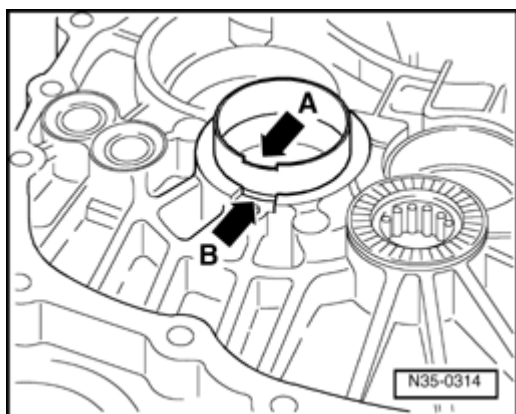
Outer race/tapered roller bearing installation position in clutch housing
